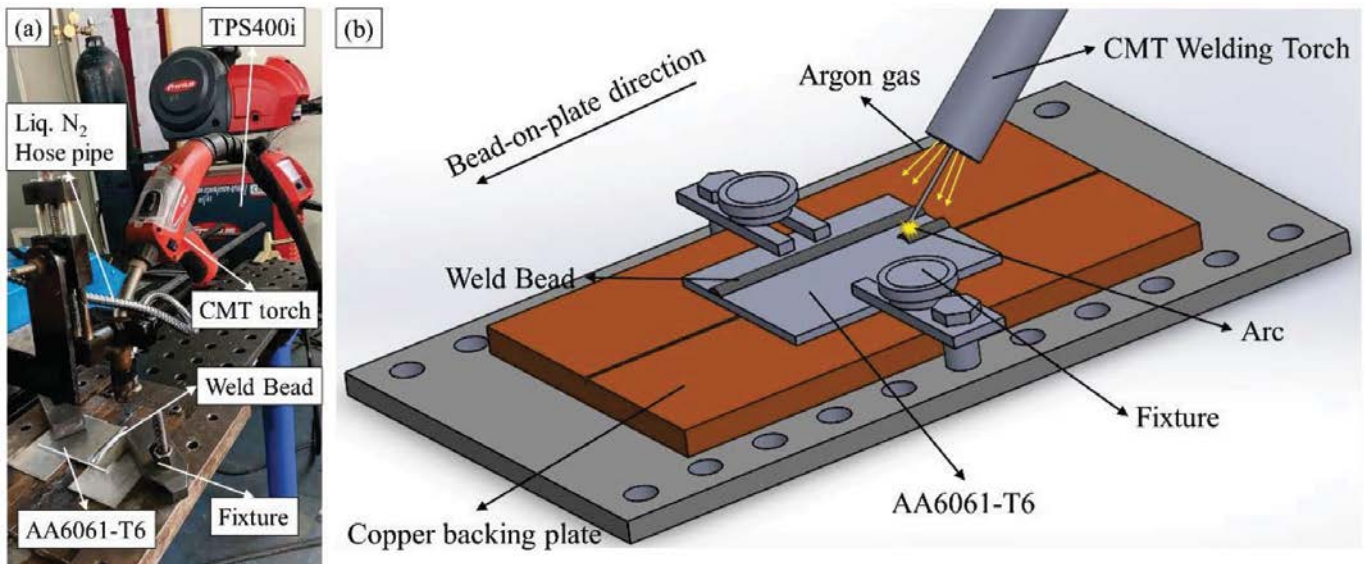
(a) CMT machine setup; and 2(b) Schematic view of fixture.
